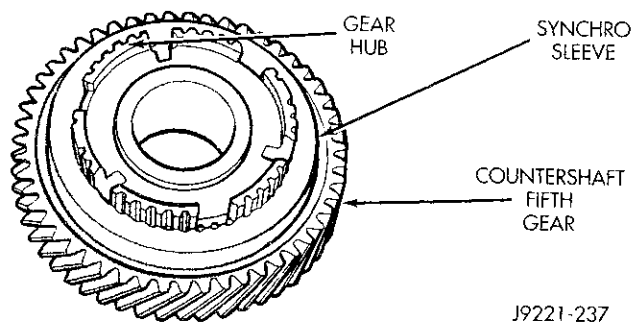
Installing Synchro Sleeve On Countershaft Fifth Gear Hub
